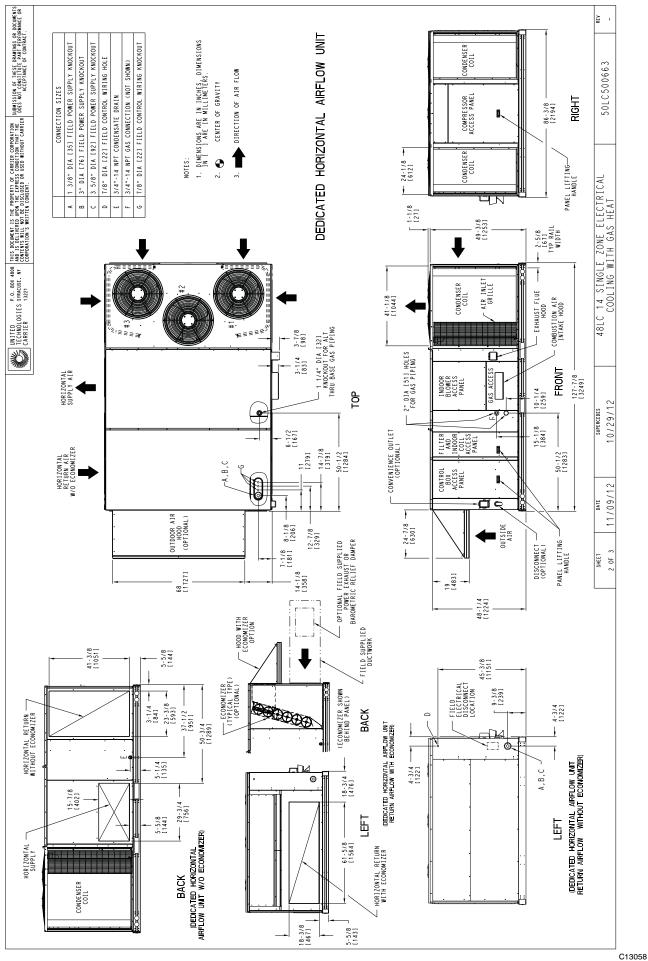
(cont.) - Unit Dimensional Drawing - 14 Size Unit, Sheet 2 of 3
